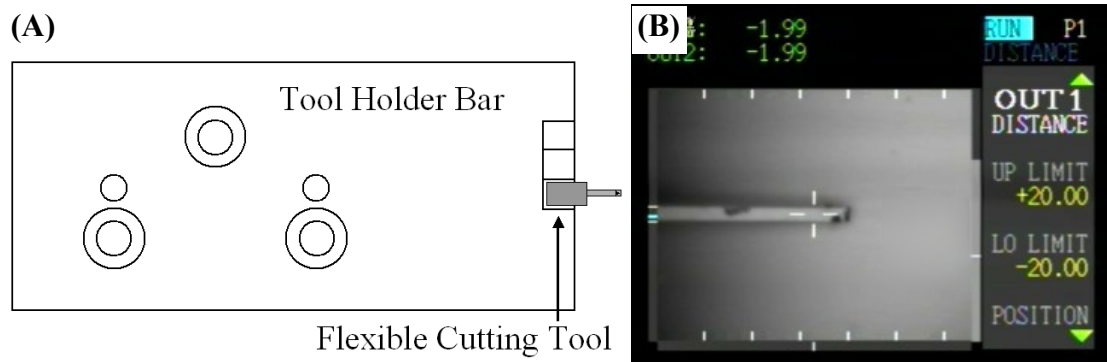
Mounted tool orientation (A) and aligned tool seen in the microscope (B)
